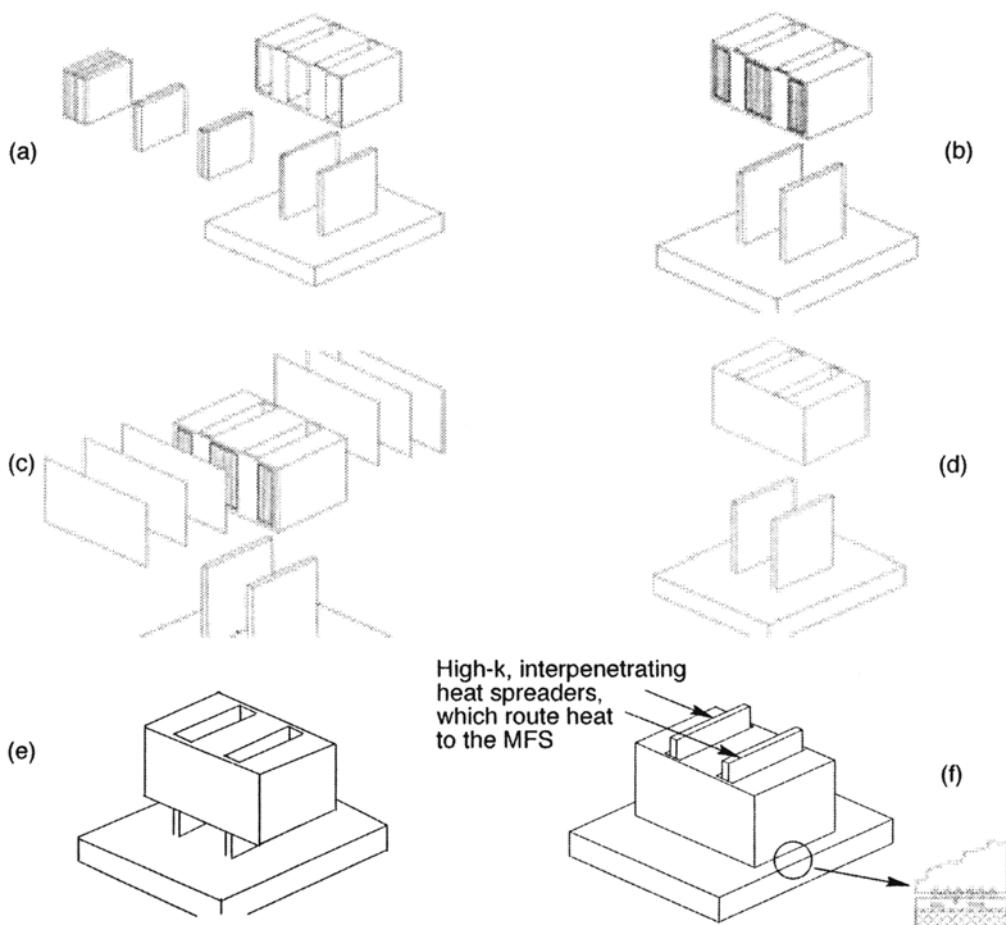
MFS in-orbit “hot-plug” concept for space logistics. (a) HIPP assembly, exploded view, before integration; (b) HIPP assembly with integrated electronics; (c) addition of microbackplane, shielding, and protective layers; (d) a completed HIPP assembly, representing payload electronics for example, ready for integration onto panel; (e) partially integrated assembly; (f) fully integrated assembly, showing detail of underside flush-mount interposer system that electrically connects payload to MFS interconnection manifold formed on panel surface.
